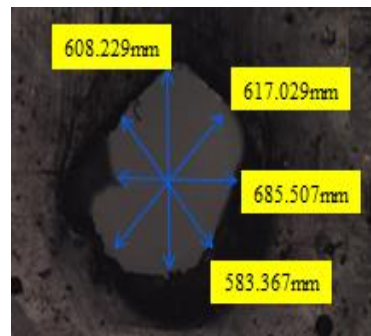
Bottom side Image of BFRP composite after laser drilling
